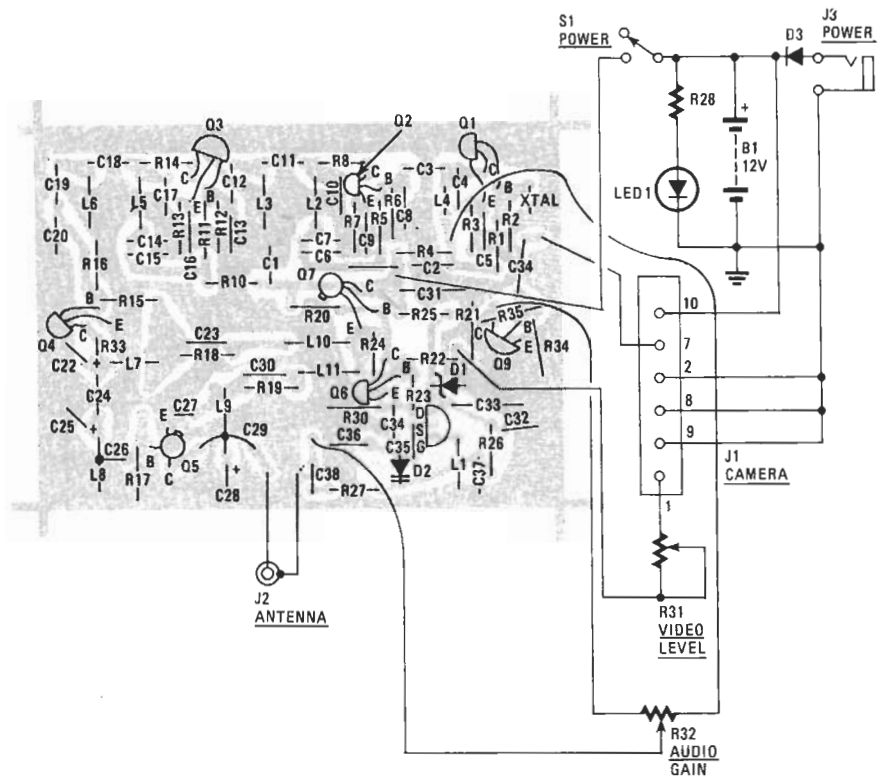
COMPONENTS ARE MOUNTED ON THE PC BOARD as shown here. Note how R31 dangles from the PC board. We suggest you use a more secure method of mounting that potentiometer than we did.
